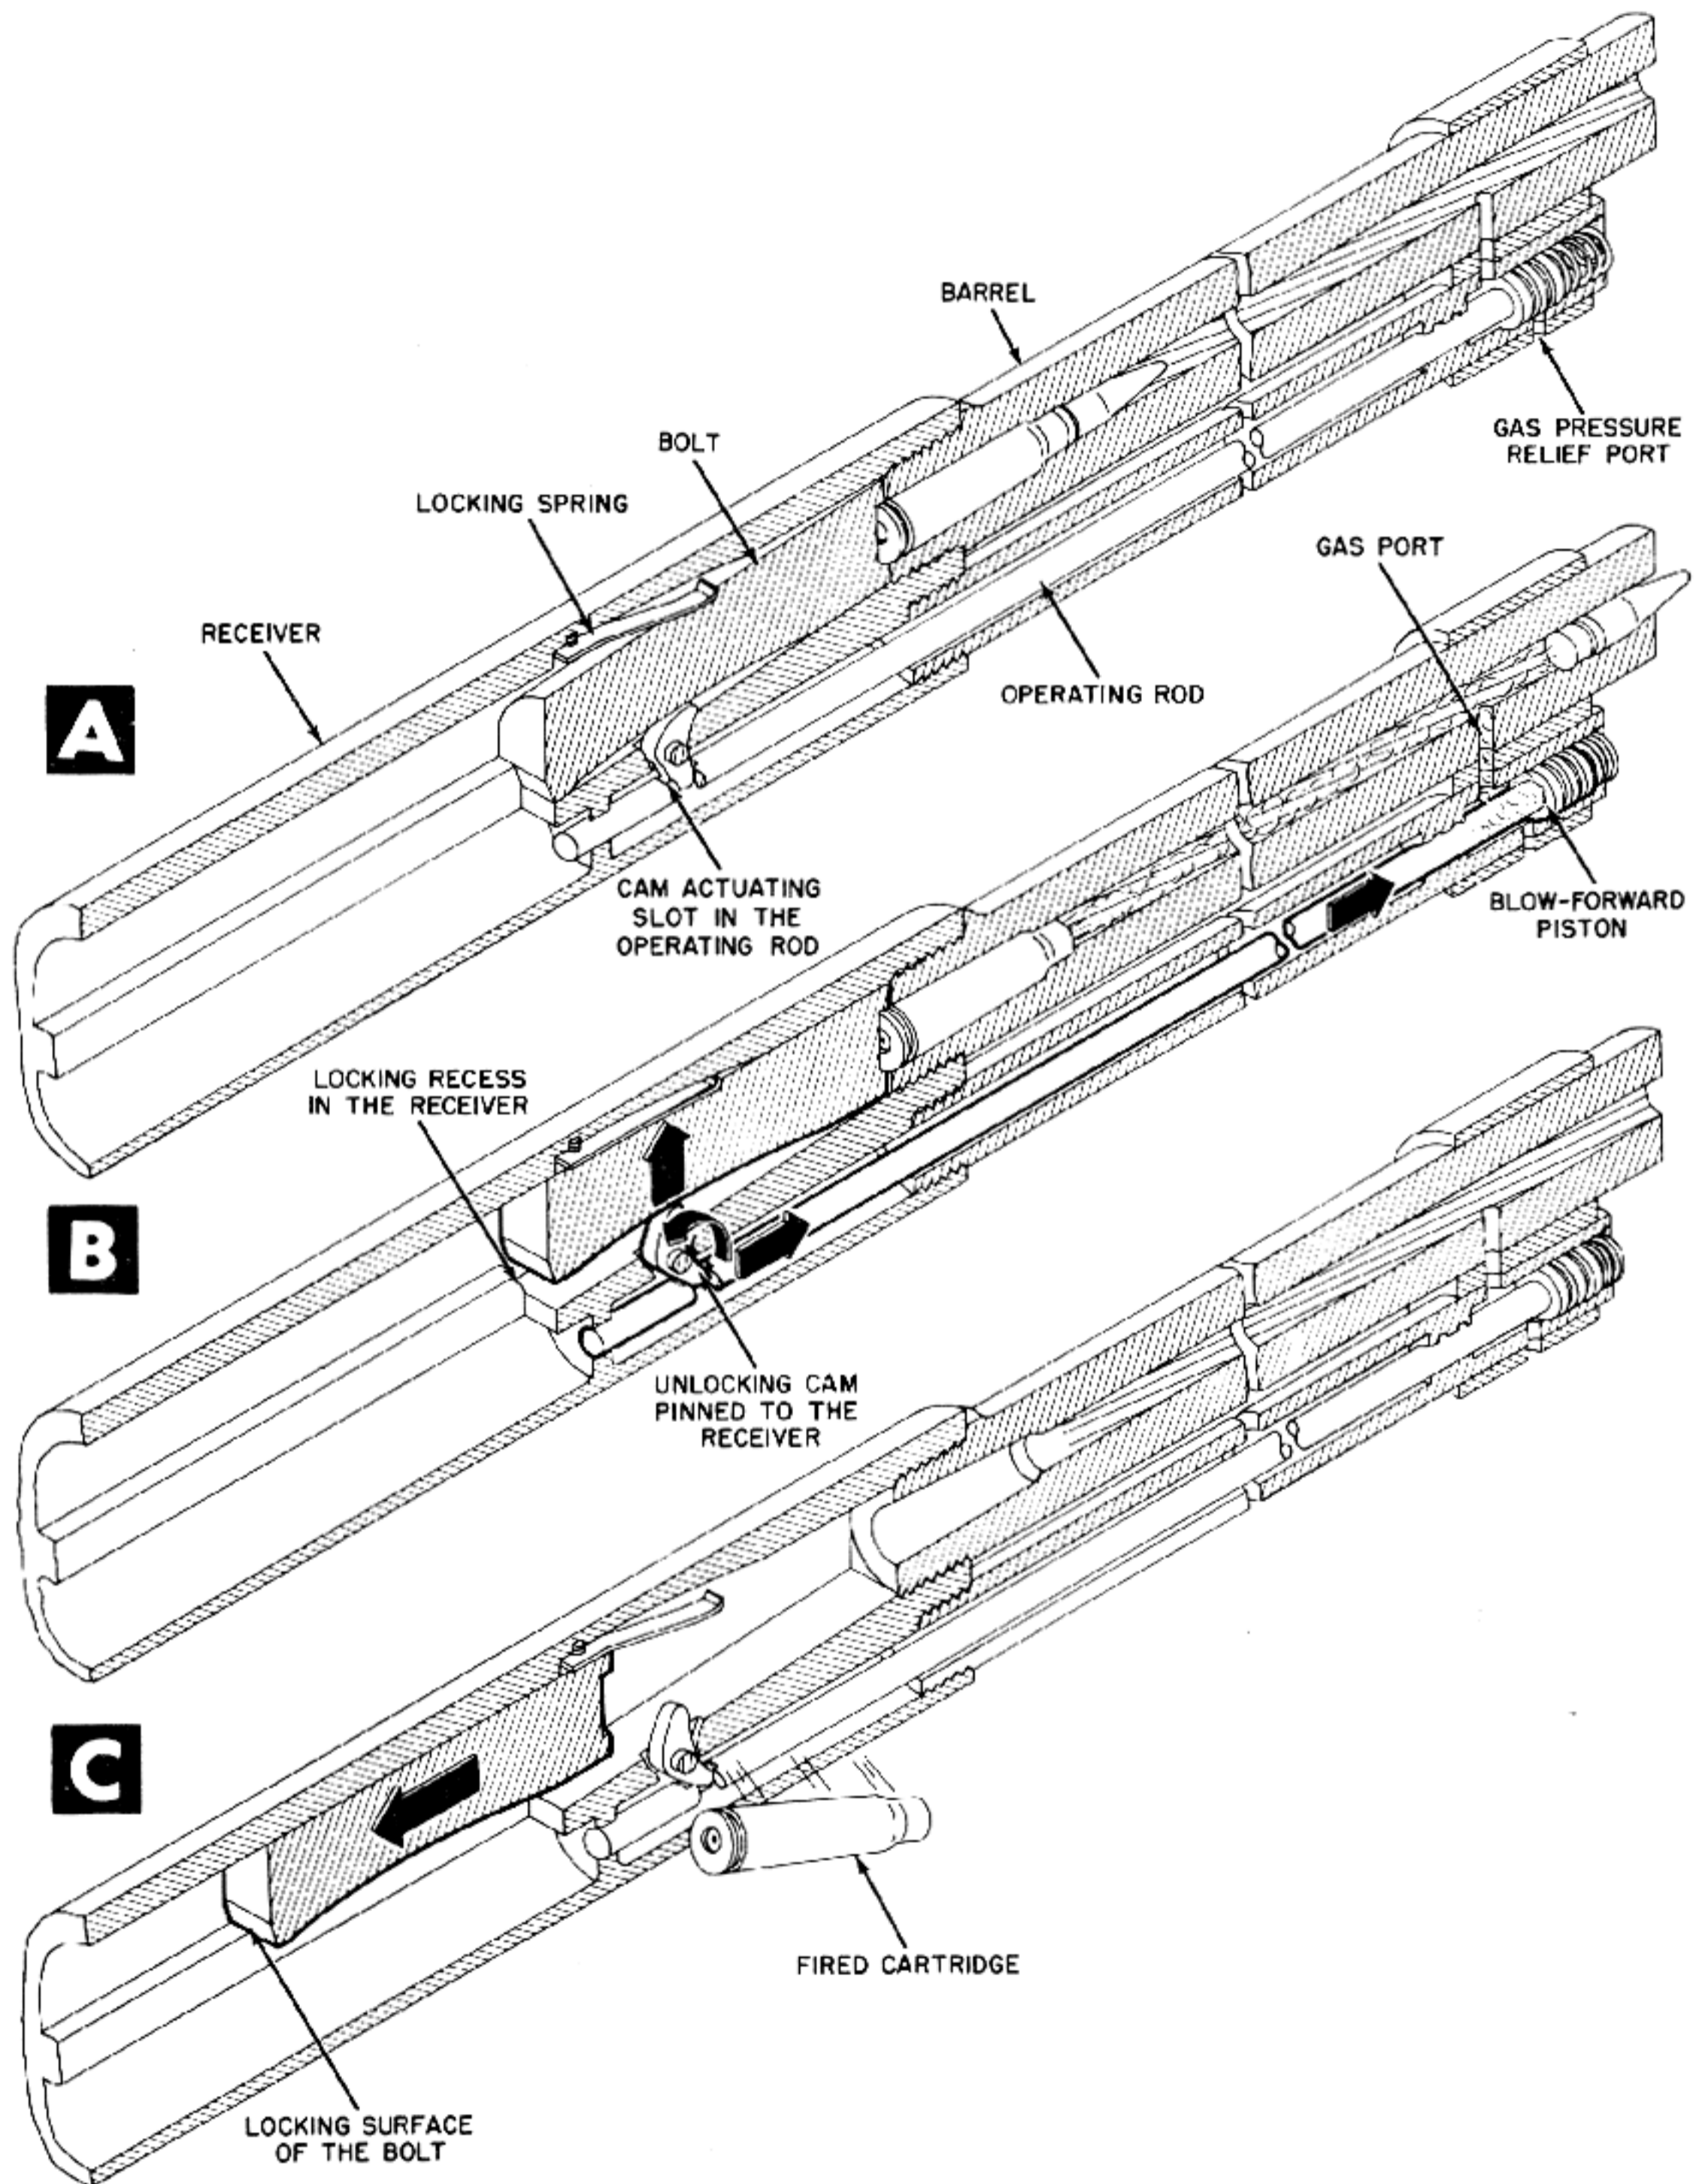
Spring Pushes Bolt Into Locking Surface When Operating Rod Removes Unlocking Cam.
